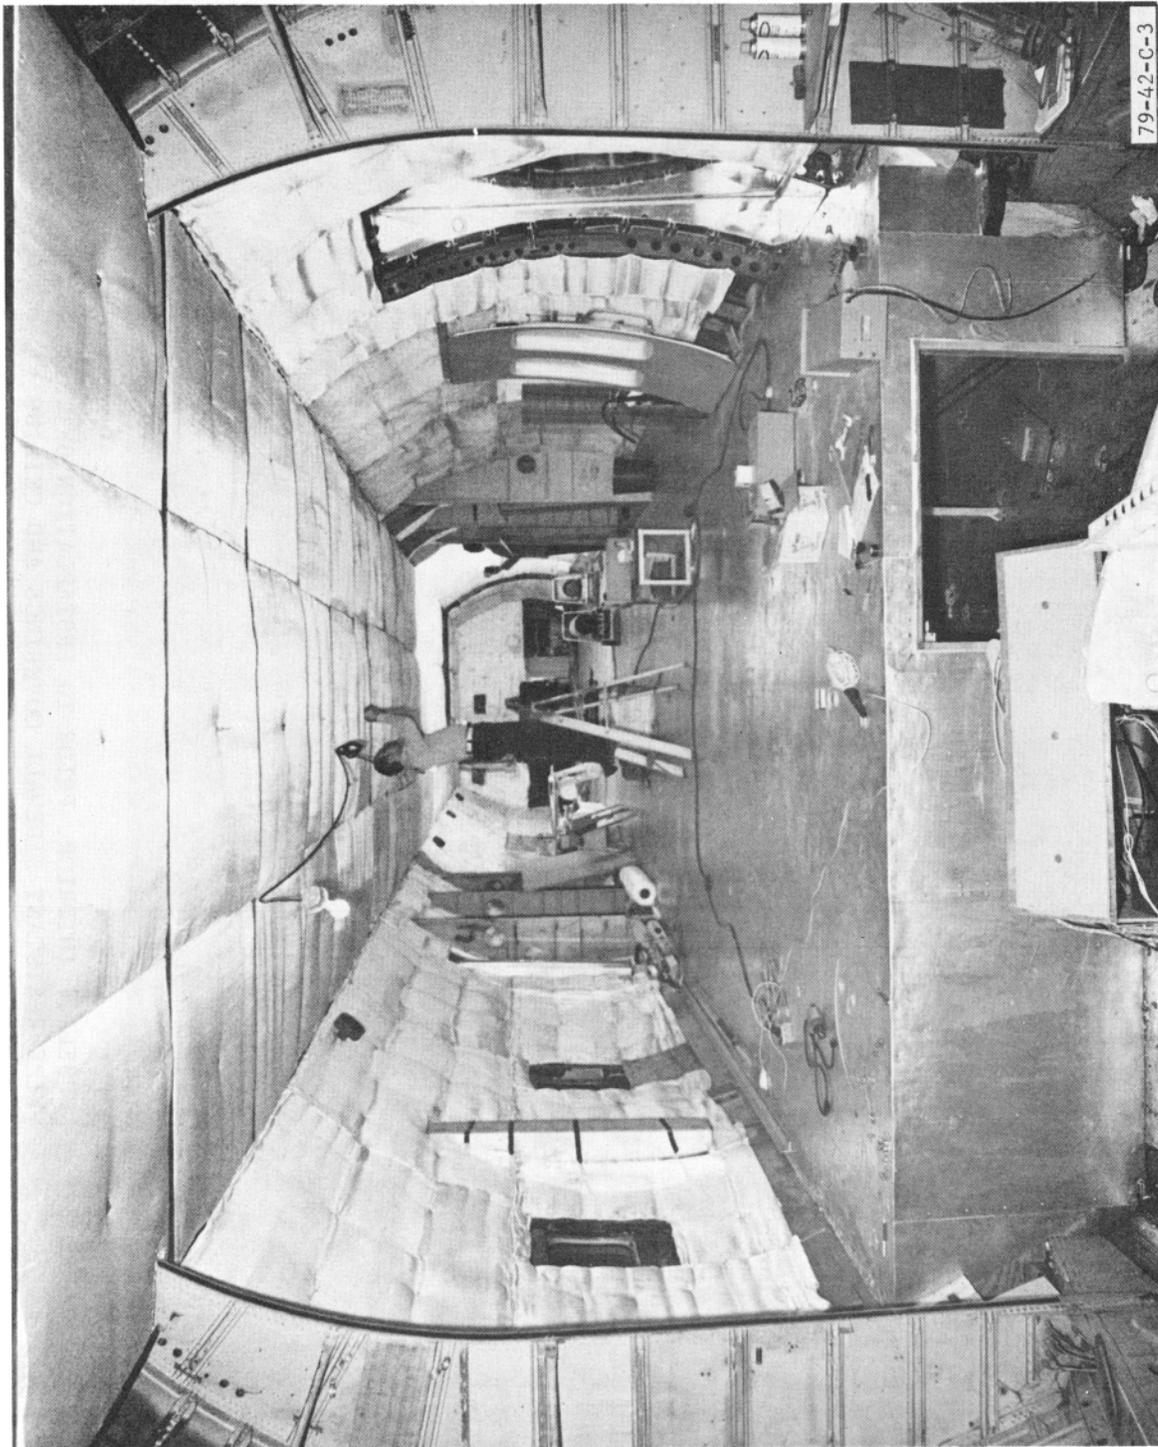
FUSELAGE INTERIOR, PRIOR TO INSTALLATION OF TEST SECTION FLOOR, FIRE RESISTANT SIDEWALL COVERINGS AND CEILING
